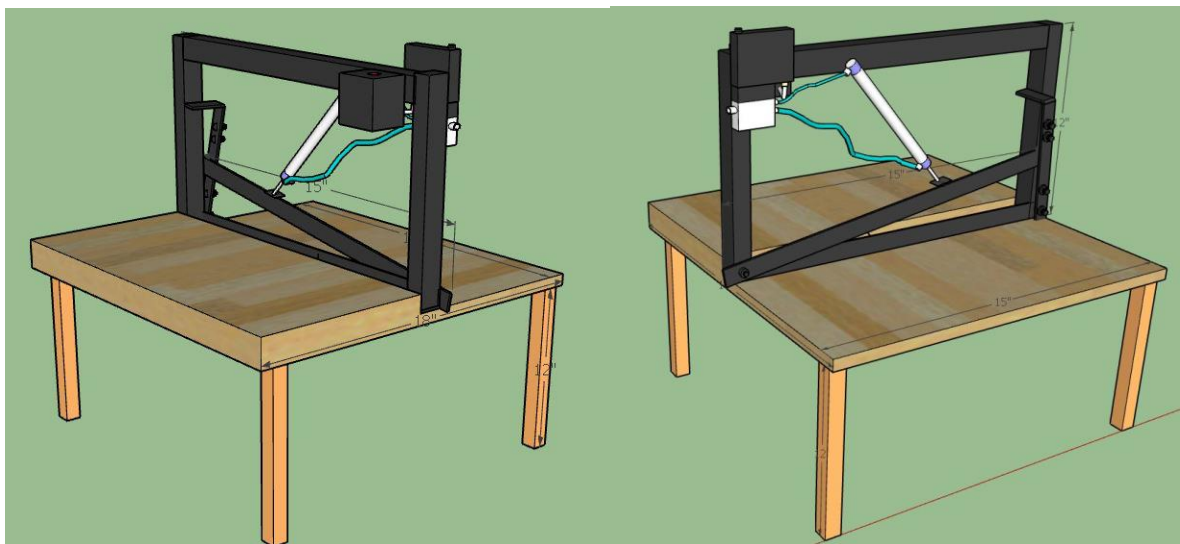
Pneumatic sheet cutting machine 3D design.
